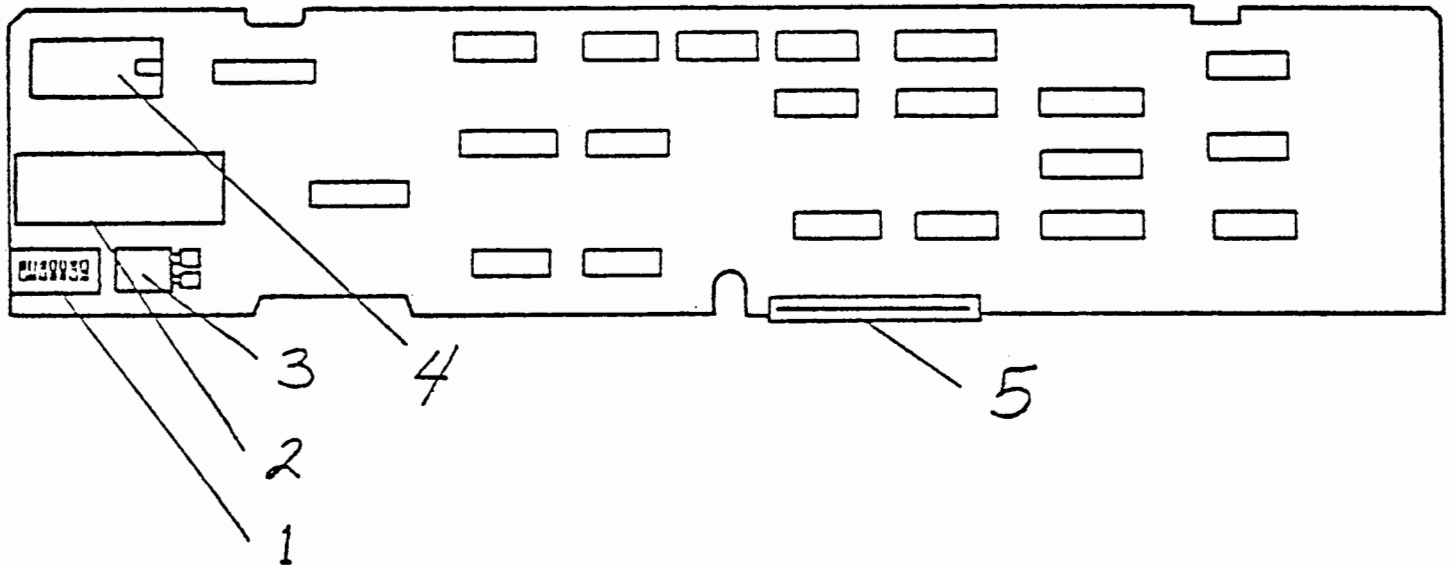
is an illustration of socketed components on the thermal printer PCA. Fill in the blanks below using figure 6 as reference for numerical meanings.
